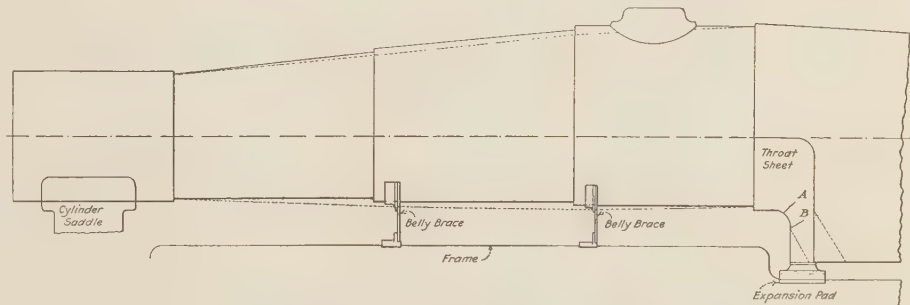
THROAT SHEET FAILURE AND BOILER SAG
